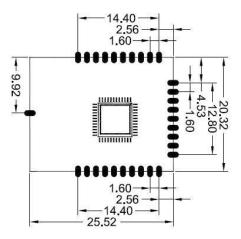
Mechanical Dimensions of CT-EM2601/2/3 modules
